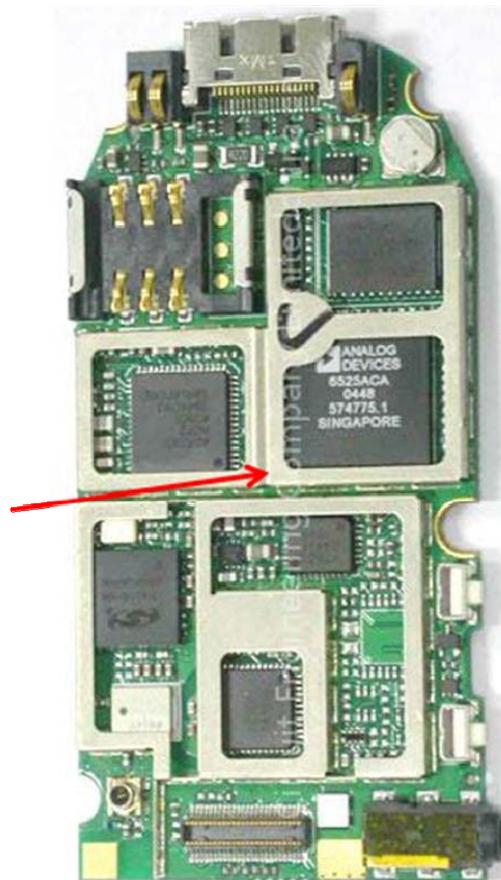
A mobile phone PCB showing a Faraday shield. Many shields are not cut away as these are. Photo courtesy of China Telecon.
